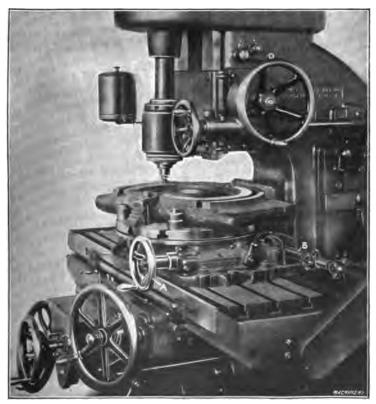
Milling a Circular T-slot on a Vertical Machine
